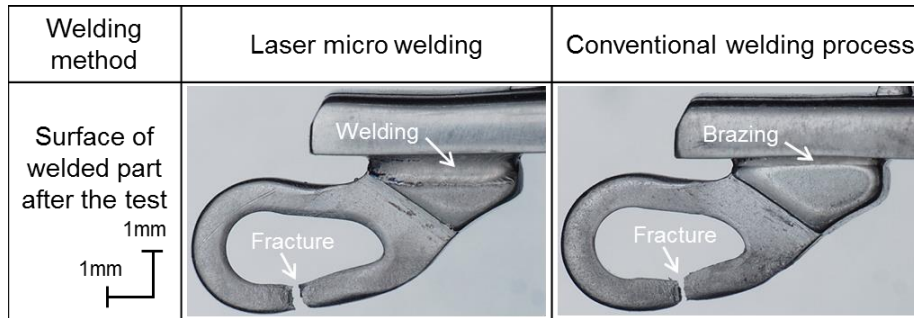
Component surfaces and welded parts produced by laser micro welding and conventional welding process.
